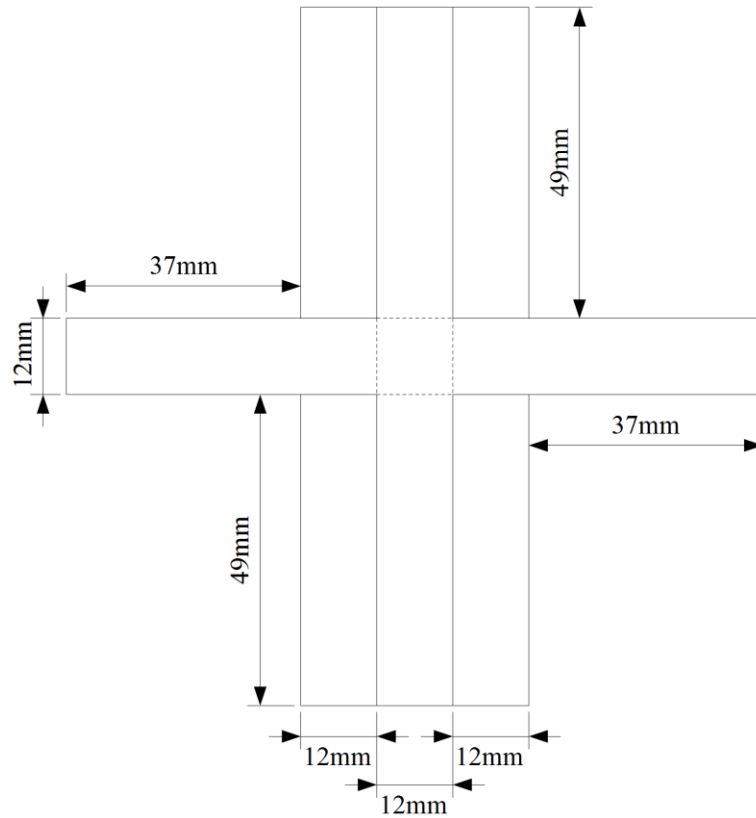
Dimension of mould in millimetre, mm. The dotted line indicates folding line and solid line indicates cutting line
